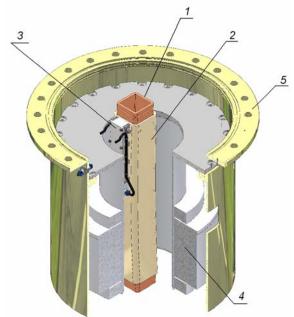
Small section casting mold: 1 – copper mold, 2 – stainless shell, 3 – eddy current probe, 4 – electromagnetic stirrer, 5 – casting molds frame
